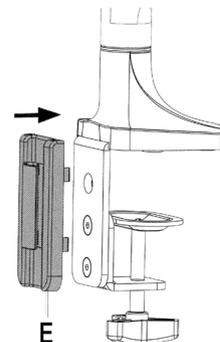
Cover the clamp mechanism D with the plastic cable guide cover E.
